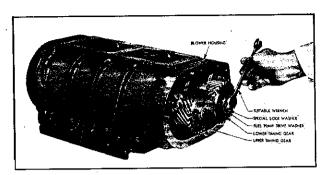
Pressing Blower Timing Gears onto Rotor Shafts
